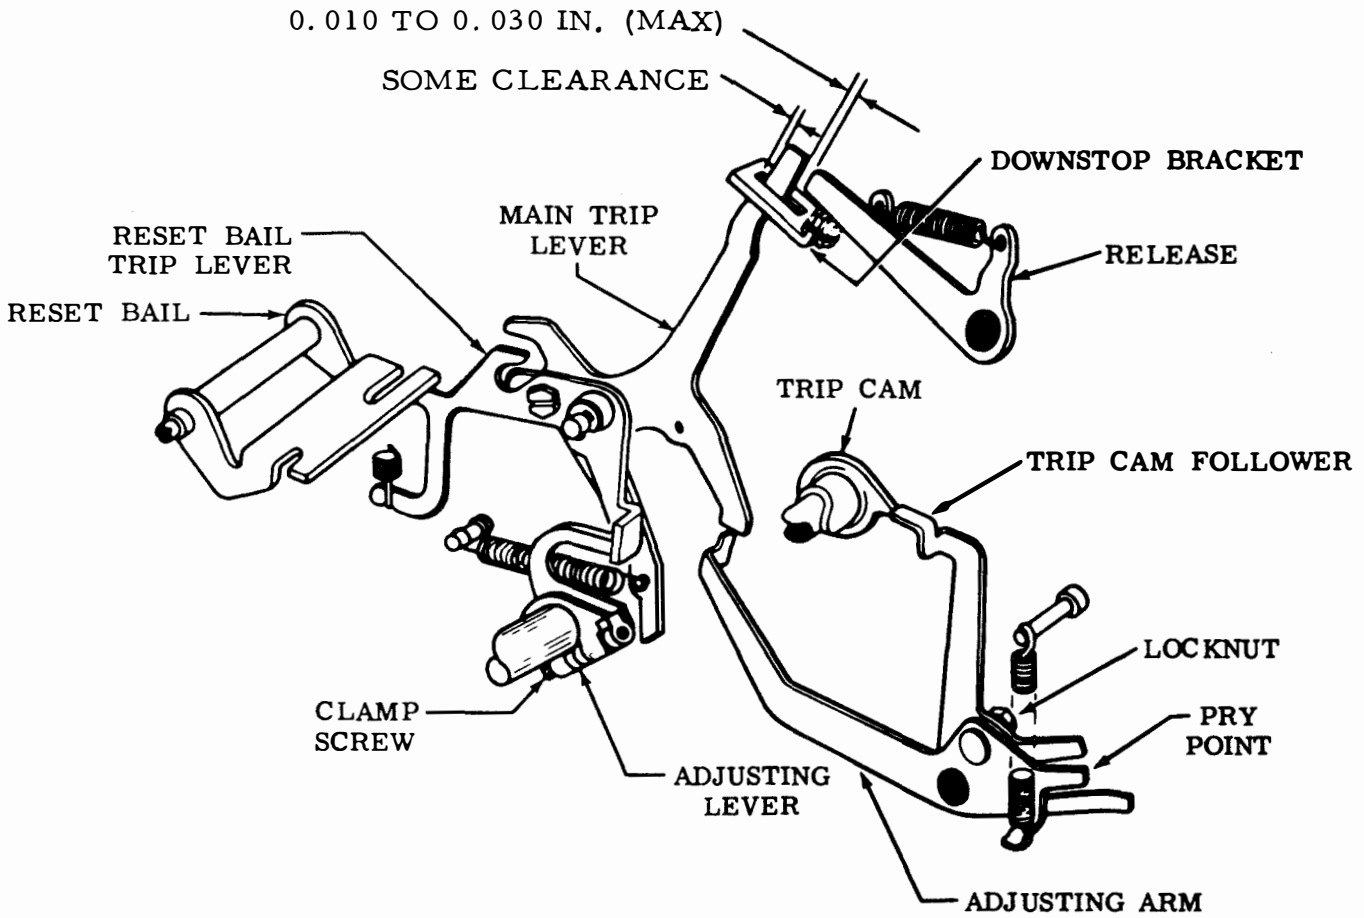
Trip Cam Follower and Adjusting Lever, Peperforator, Front View
